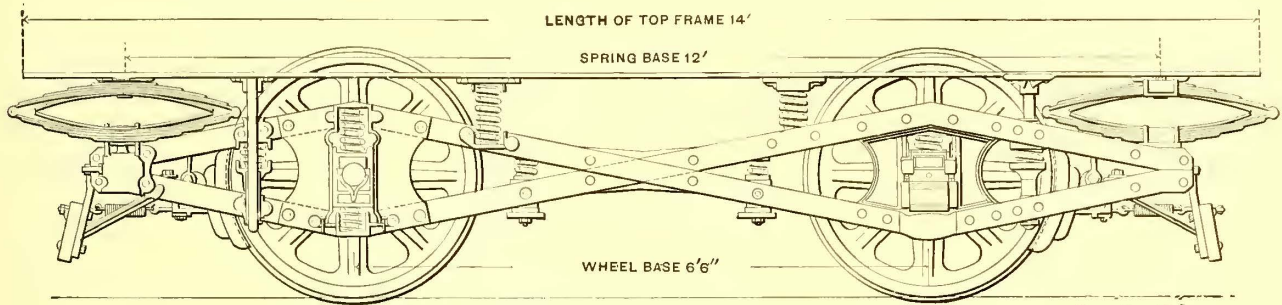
SIDE ELEVATION OF TRUCK NO. 3.
